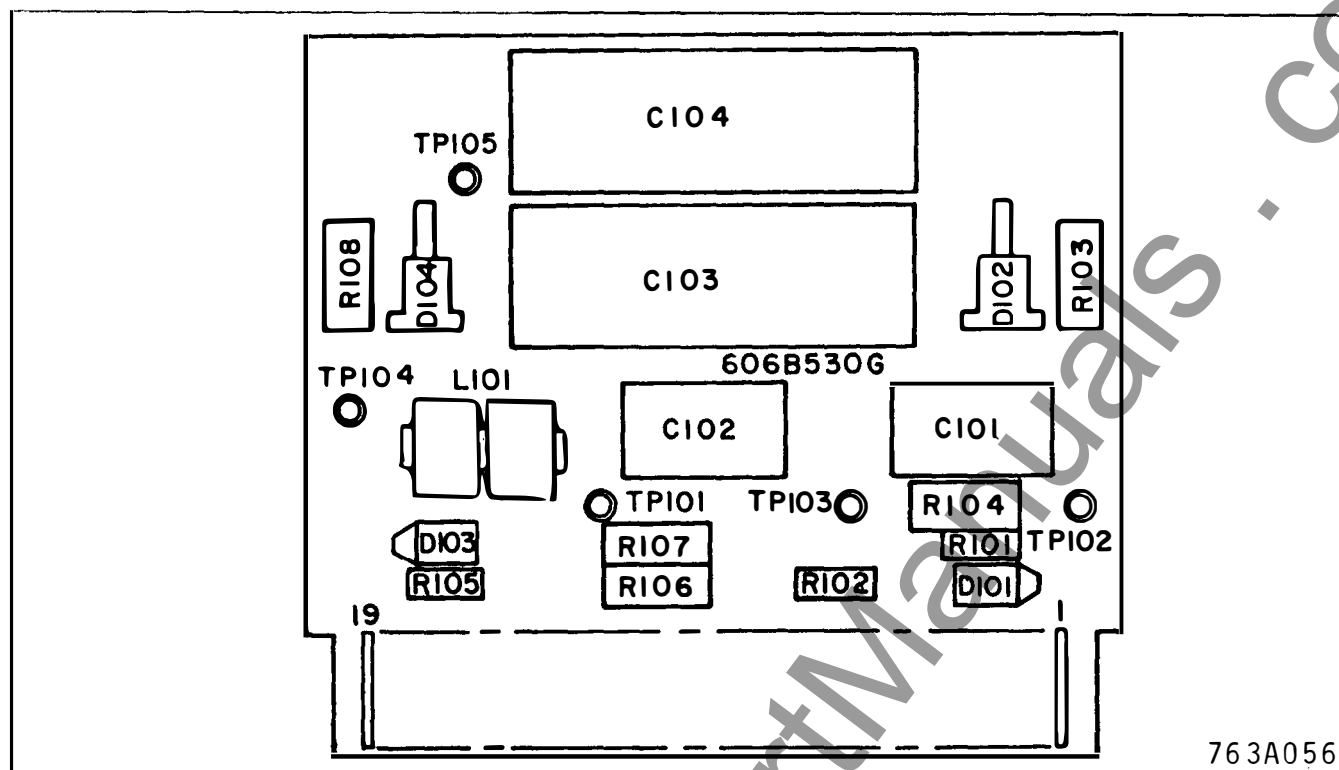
Component Locations of the Type TCF Transmitter Assembly.
